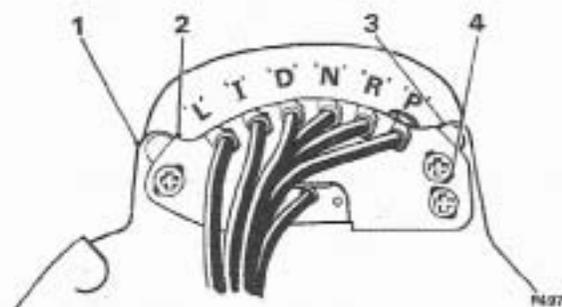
MOVING AND FIXED CONTACTS (REAR VIEW)
